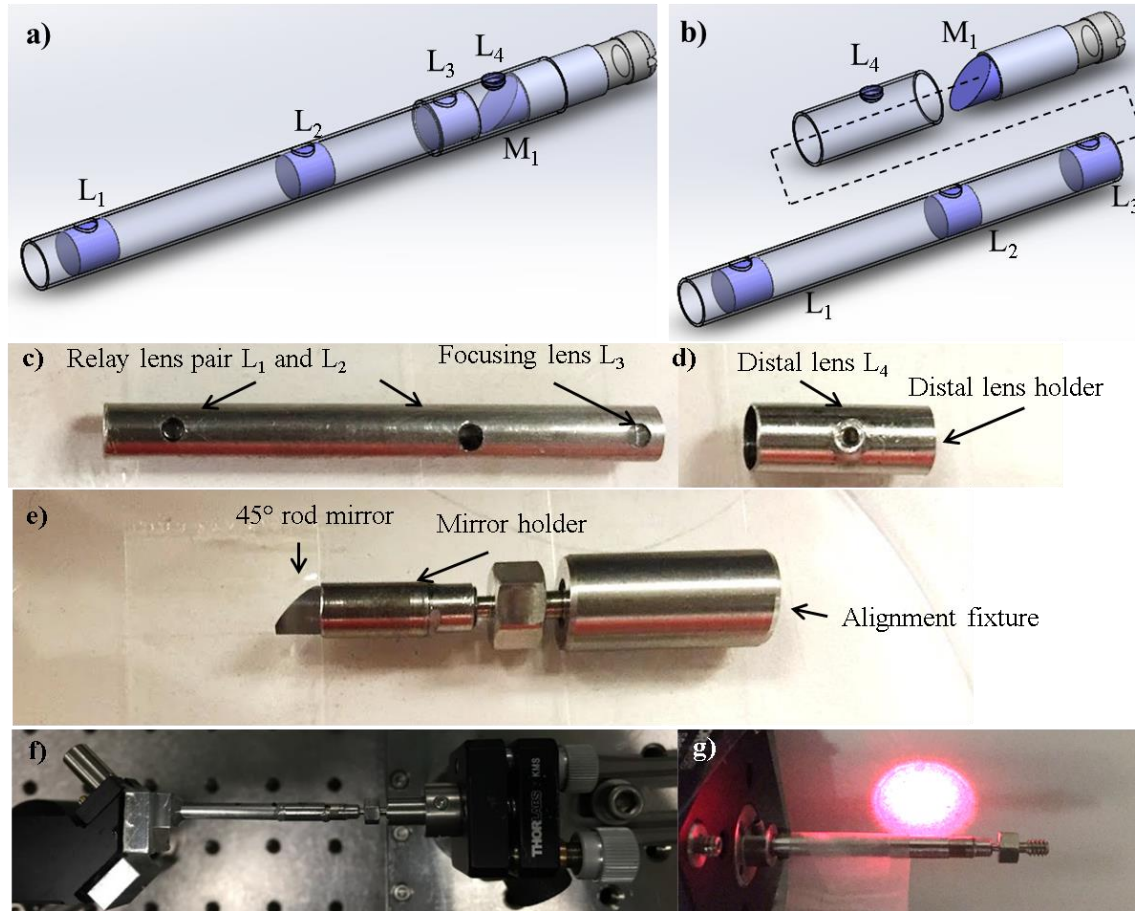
Distal probe design and packaging. a) CAD drawing of the probe assembly and b) the exploded view. c) Fabricated stainless tube for relay lens pair and focusing lens. d) Distal lens holder. e) Rod mirror holder and alignment fixture. f) Alignment of the rod mirror using a 2DOF rotational stage and a 3DOF translational stage. g) Beam profile after alignment.
